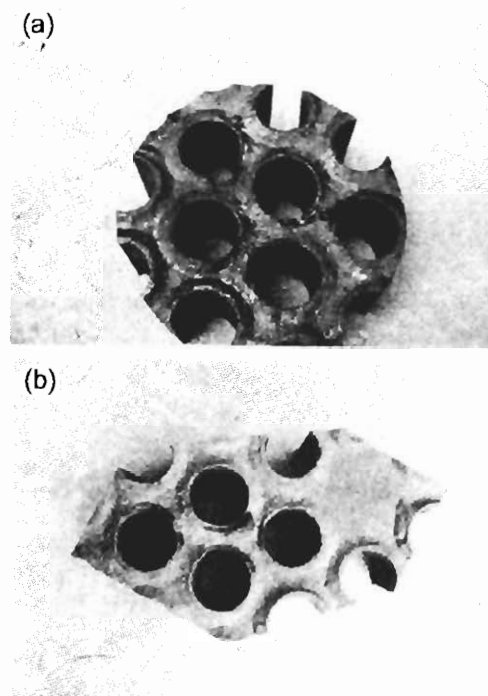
Samples of tube sheet (a)lower, (b)upper
